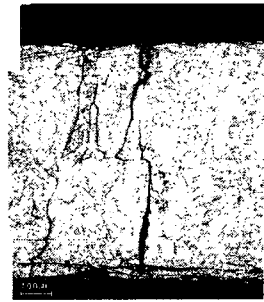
Cross section of Zn coated steel spot weld showing through-thickness cracks
